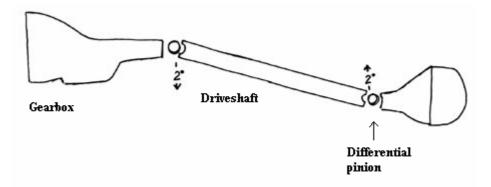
Relationship between gearbox output shaft, driveshaft and pinion
